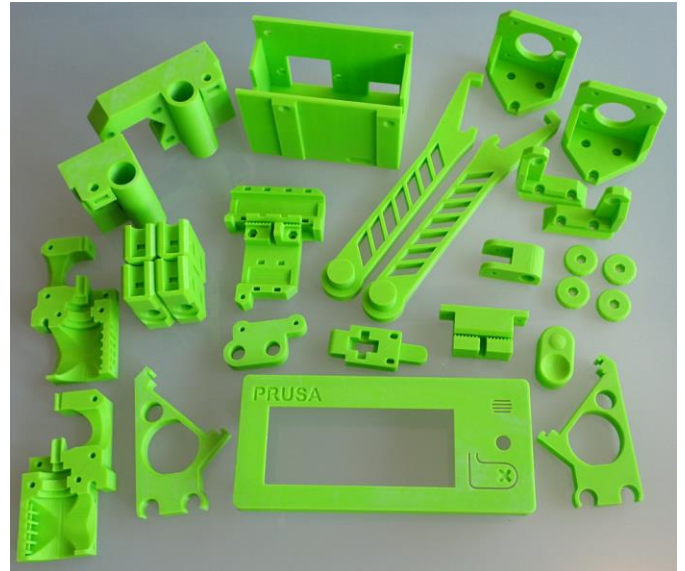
Other examples Prusa low cost AM produced parts used in product kits
